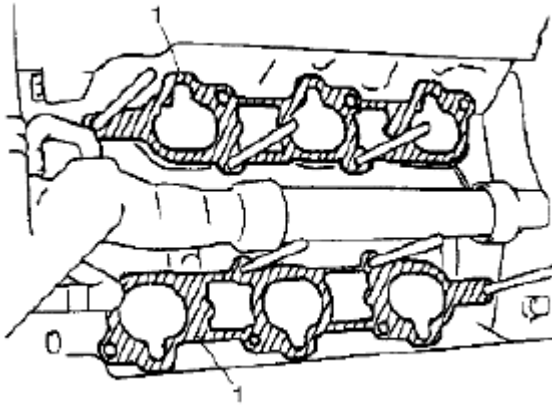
Identifying Intake Manifold Bolts & Nuts
